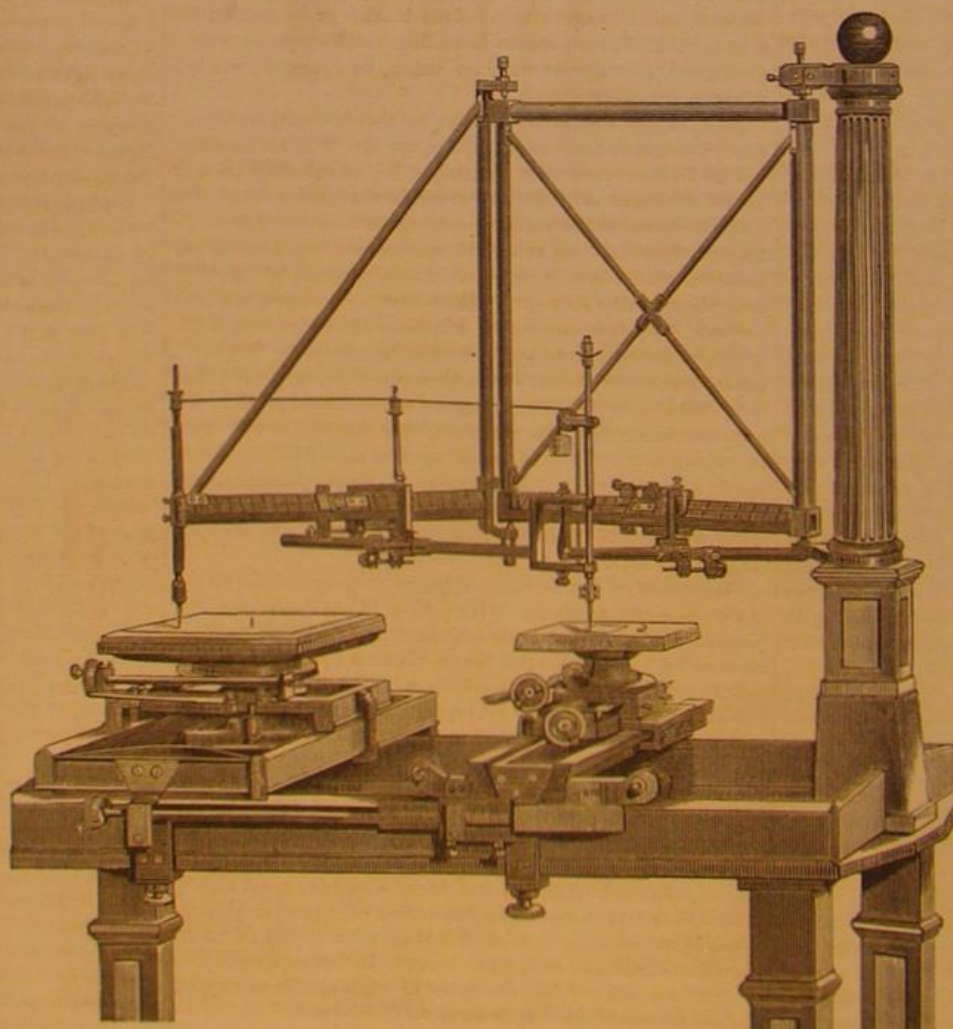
LOTZ' ENGRAVING MACHINE.
